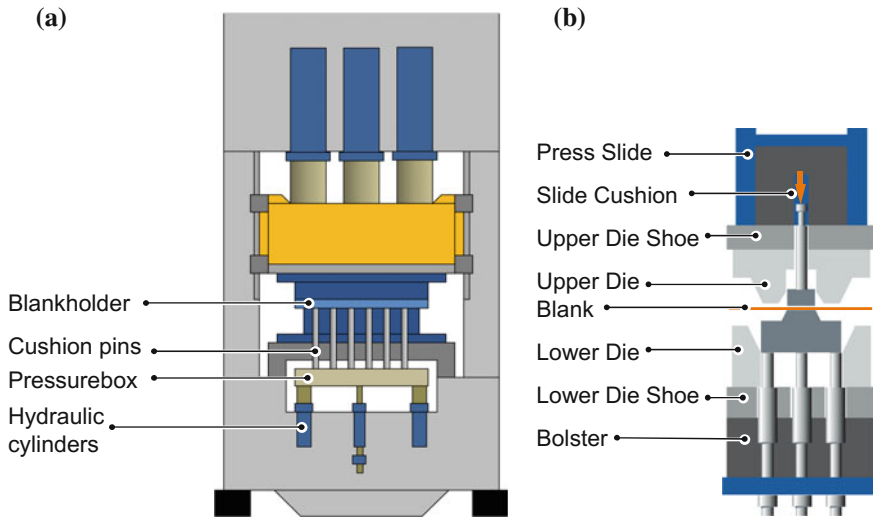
Cushion systems in hot stamping hydraulic presses: a hydraulic cushion with pressure box (recreated after [66]), b multi-point cushion system for hot stamping purposes [70]
